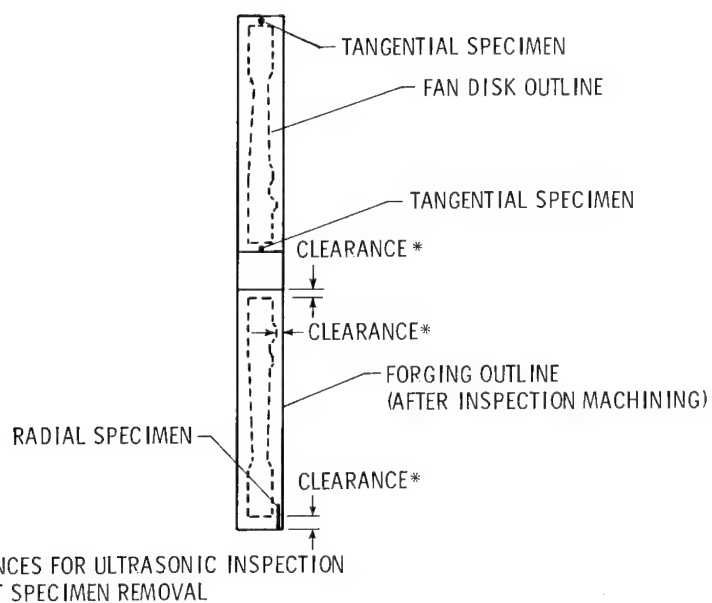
Forging allowance for ultrasonic inspection and test specimens.
